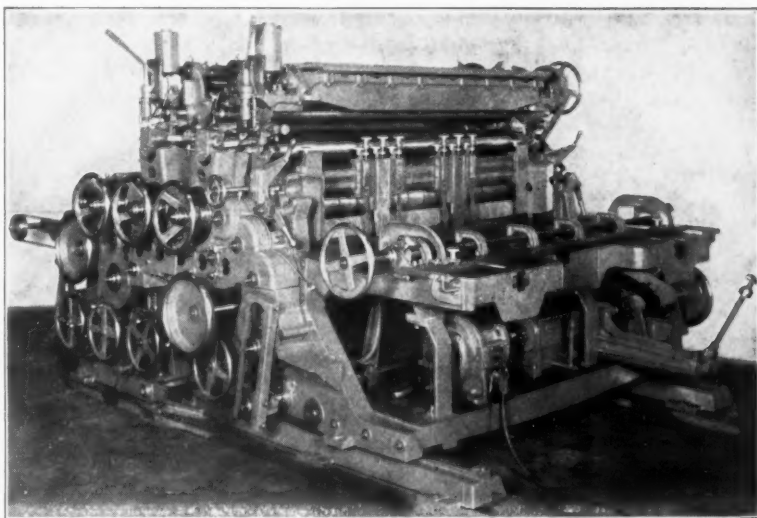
A box making machine of F. X. Hooper Company design equipped for automatic lubrication by positive application of measured amounts of oil at regular intervals to many of the most important bearings.
